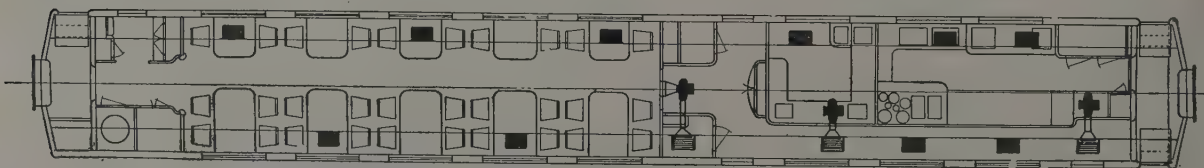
Floor Plan of Diner with Recommendations for Mudge-Peerless Ventilators and Blowers.
